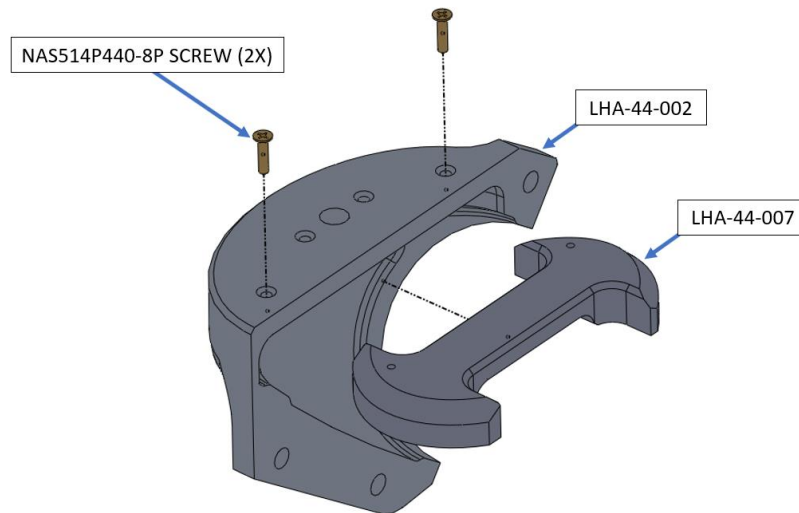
Assembly of the Right-Hand Clamp Half to Clamp Spacer.
